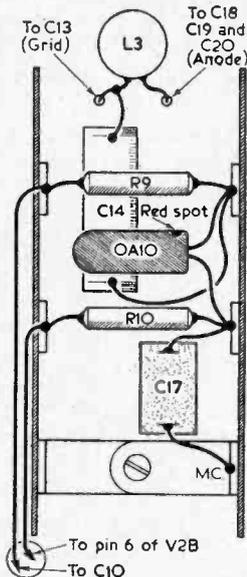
Wiring of the oscillator coil and tuning correction assembly.
